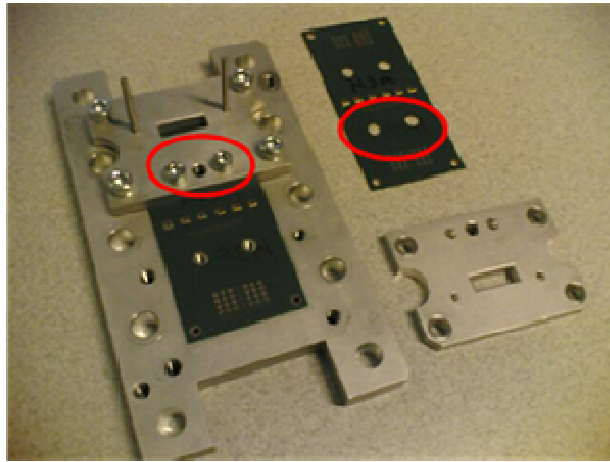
Fixture modification, showing center bolt, to minimize flexure of top plate.
